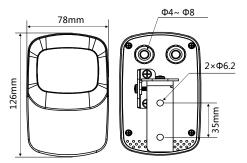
Dimensions - Front View Figure 3. Dimensions - Back View
